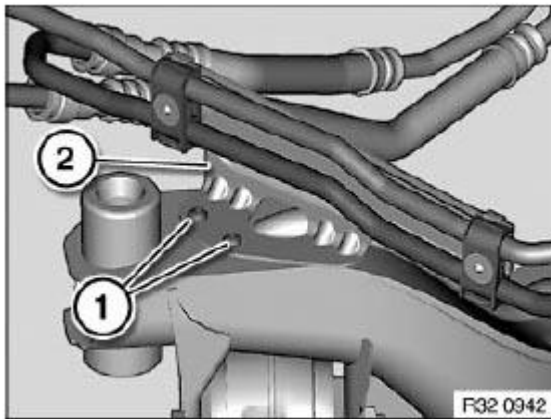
Identifying Bracket For Transmission Oil Cooler Lines
